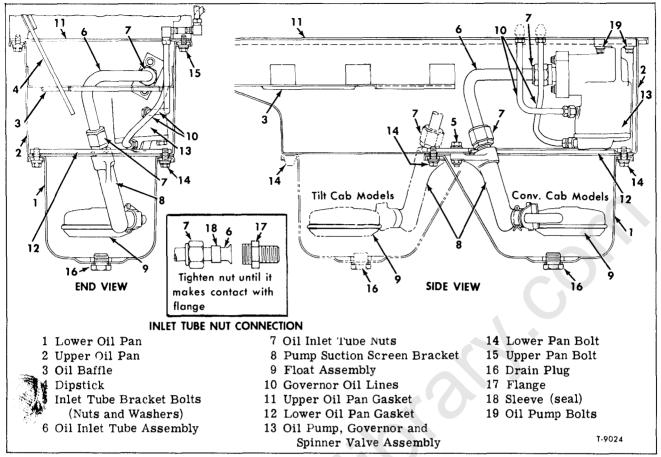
Oil Pan, Oil Pump, and Inlet Screen Installation (637 V-8 Engine)
